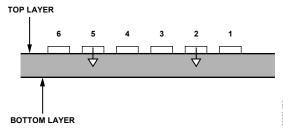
Pinout of TOSA Footprint on PCB (Looking Toward the Edge of the Board Cross Section)
